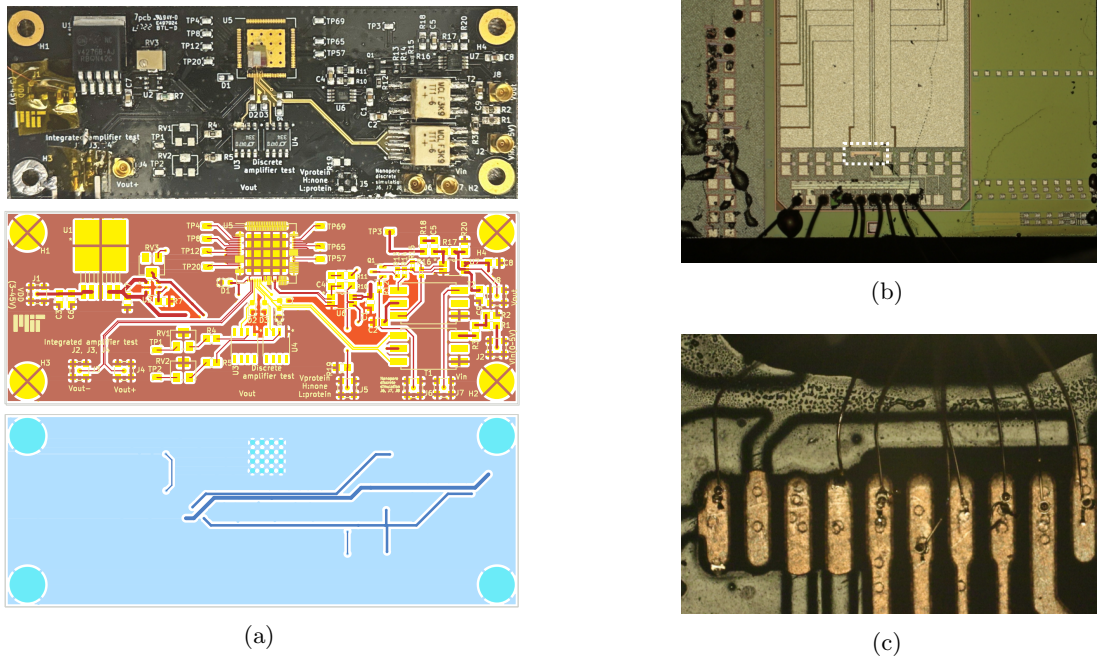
Testbench PCB (a) Top: Fabricated PCB with wirebonded TC2 chip, middle: the layout of top layer with emphasis on surface mount pads, bottom: the layout of bottom layer of the PCB which is mostly a grounded plan except for the dark blue traces that are DC supply line (b) Wire bonding from chip side (c) Wire bonding pads on the PCB side: the pads on PCB were manufactured with the gold immersion finish to ensure compatibility with gold wire bonds commonly used
